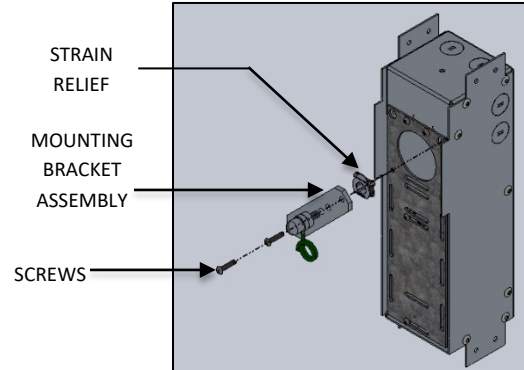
MOUNTING BRACKET DISASSEMBLY
